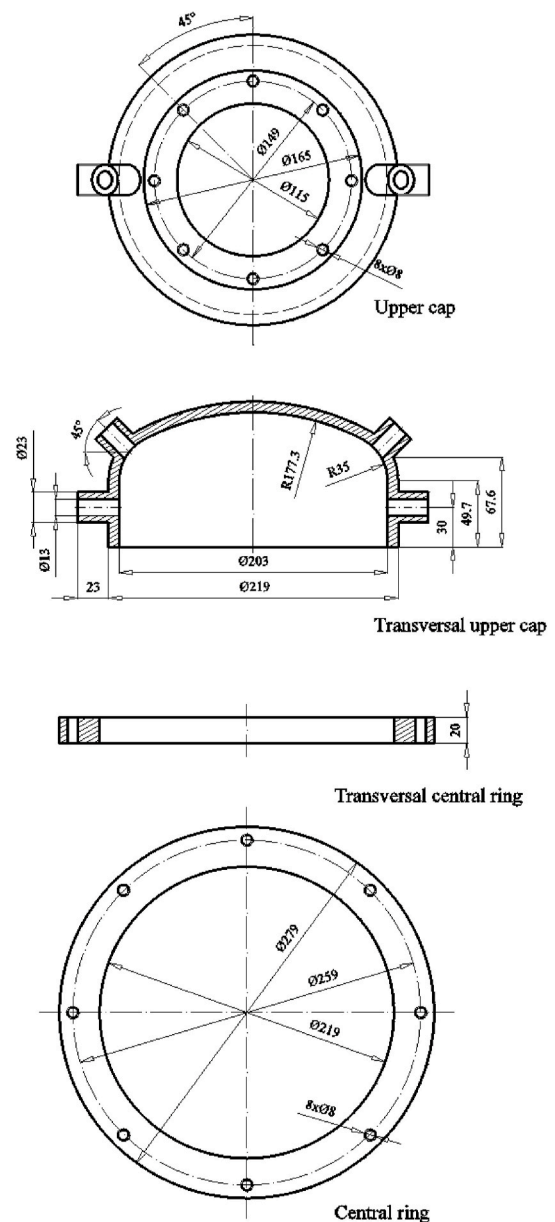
Views and dimensions (in mm) of the ignition chamber.
